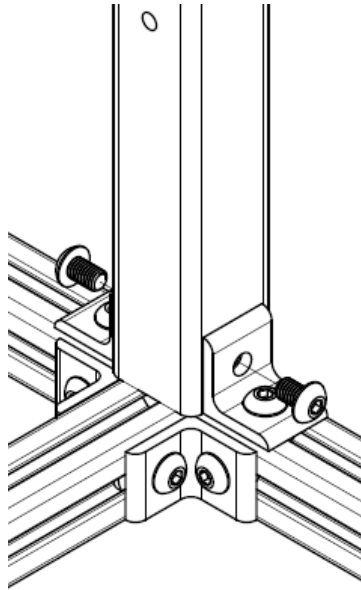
Insert the Square Tube and screw it by using two M5 screws
